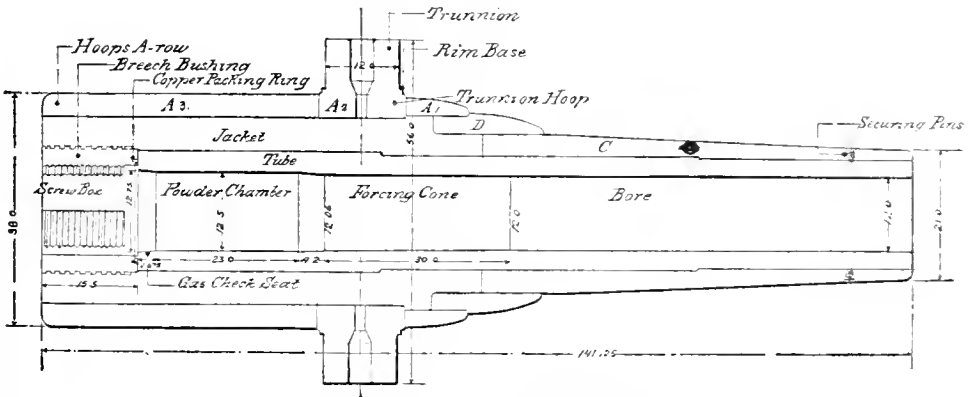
12-INCH BREECH-LOADING STEEL MORTAR.
